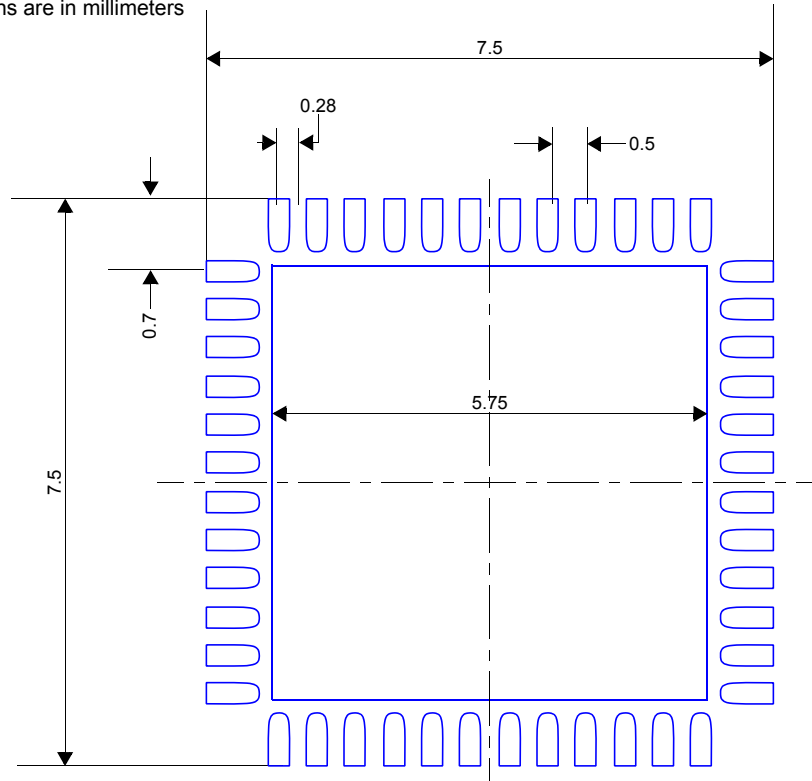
Package VFQFPN2-48 recommended footprint dimensions
